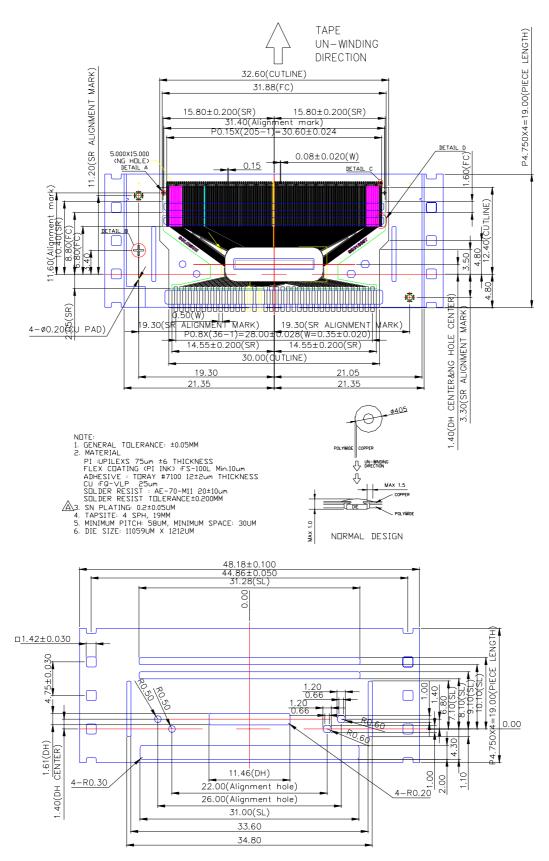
SSD1805TR1 TAB Drawing (Copper view)
